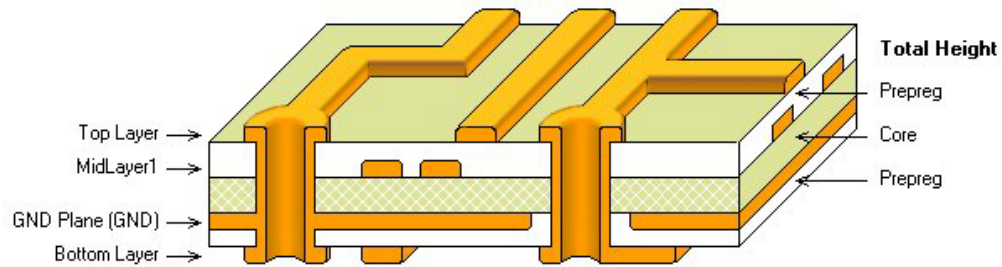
STACK-UP FOR 4 LAYER PCB
